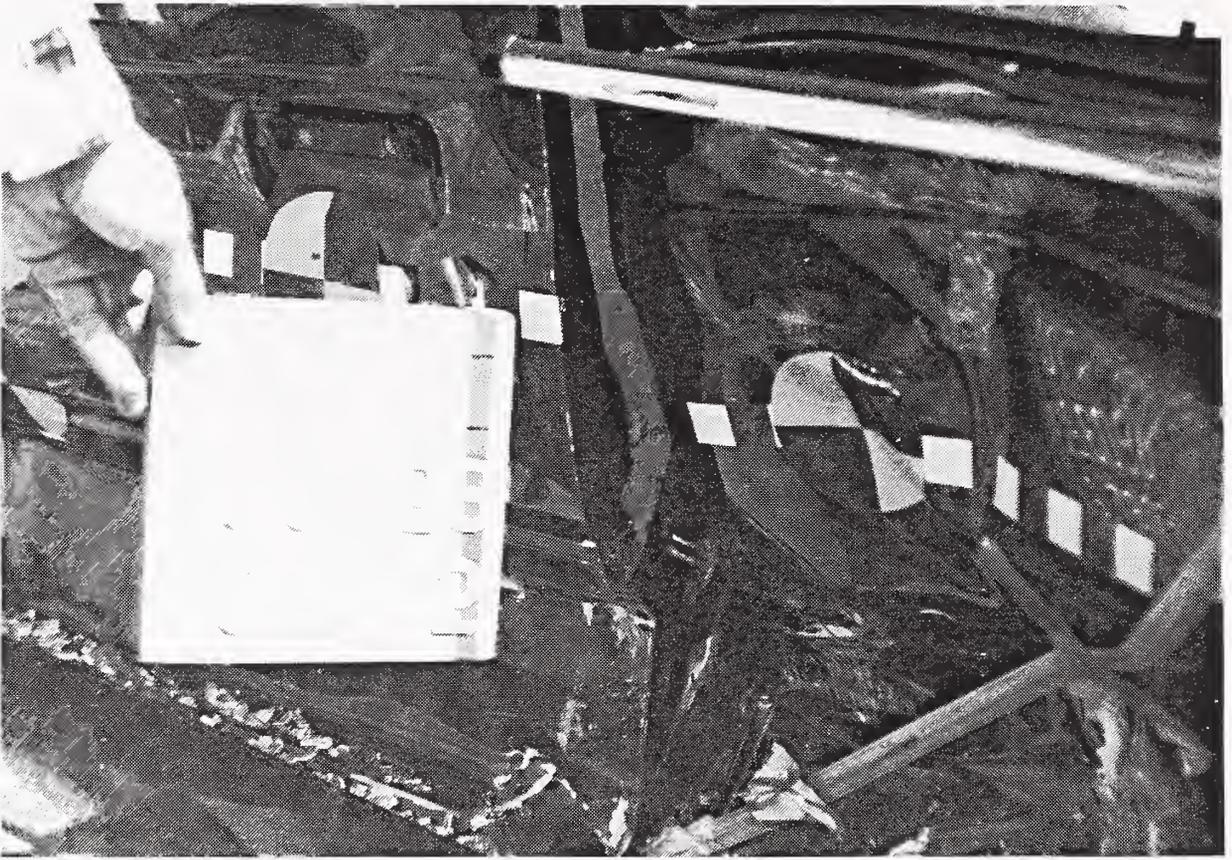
POST-TEST LEFT DOOR LATCH VIEW
